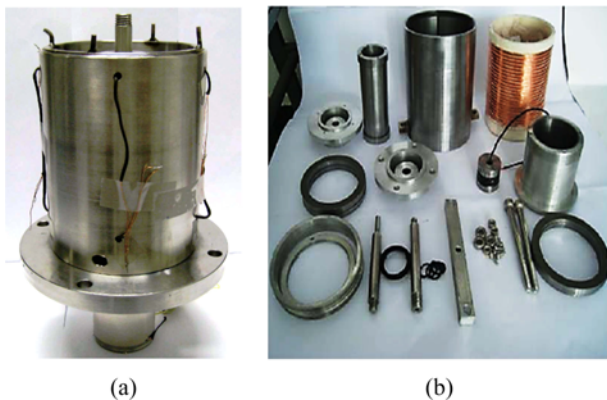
(Color online) Images of fabricated prototype: (a) Developed assembled prototype and (b) prototype's disassembled parts (Chen and Liao, 2012a).
